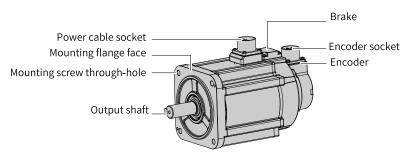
Components of servo motors in flange sizes 100/130/180
